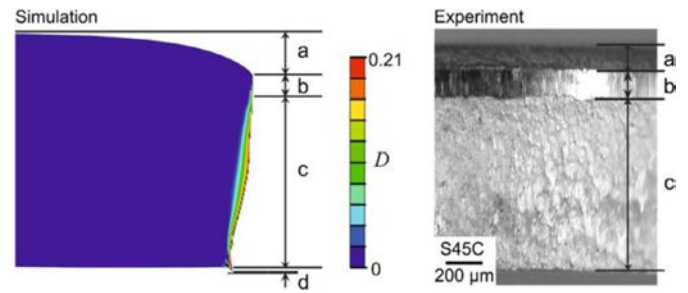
Experimental and simulated cutting surfaces in blanking of high-carbon steel sheets [88].
